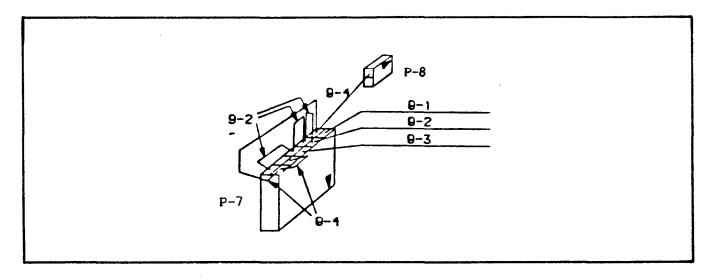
Wire Harness for 118-0358-01, -02 and 118-1004-01
